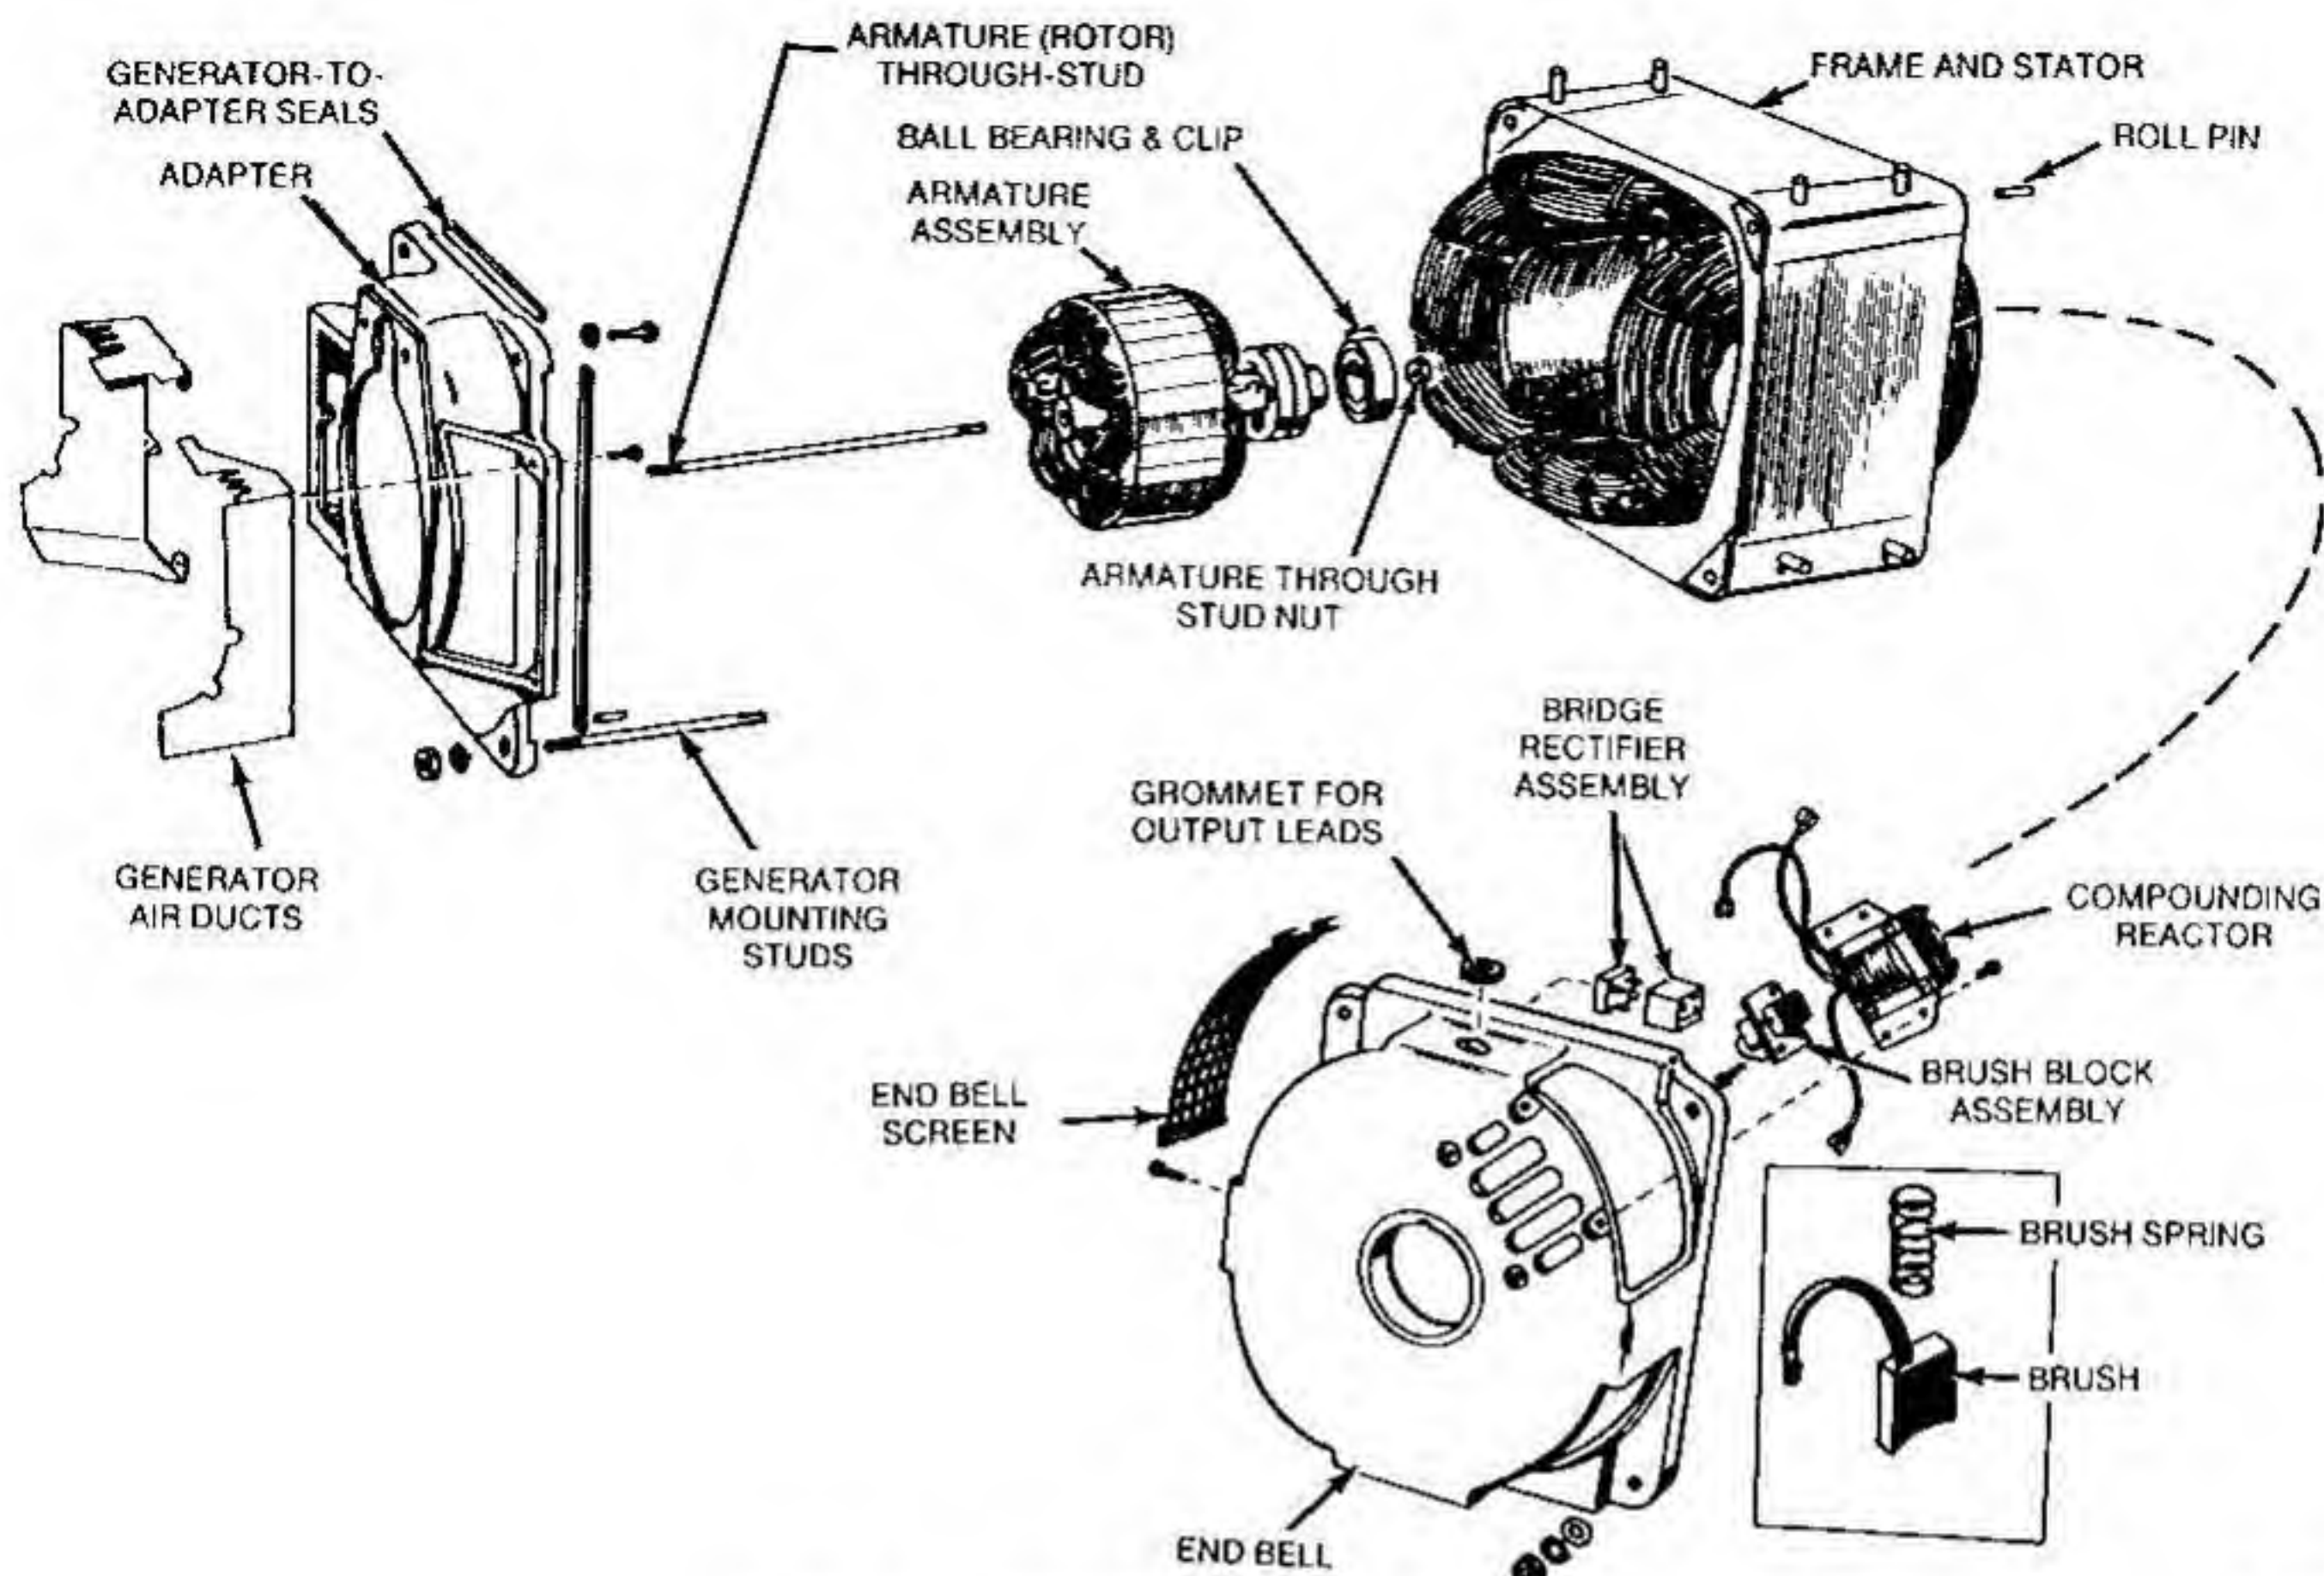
EXPLODED VIEW OF AC GENERATOR
